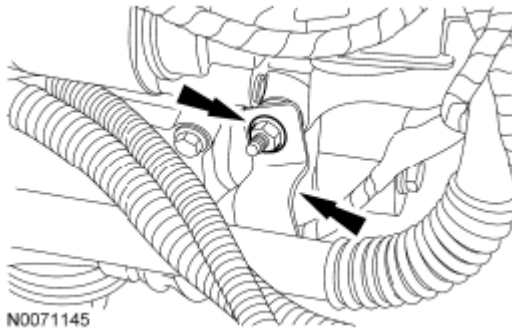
Locating Starter Motor Stud Bolt And Power Steering Tube Bracket
